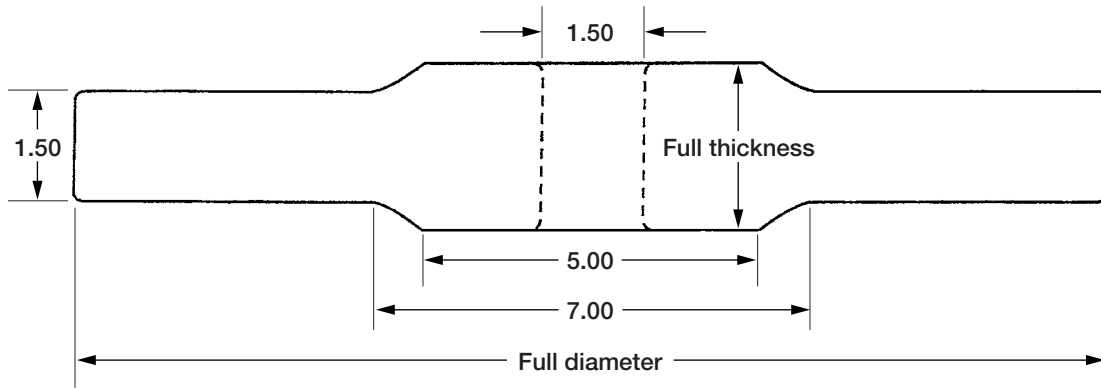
Machining plan for heat treat shape of Alloy 10 forgings. All dimensions in inches.
